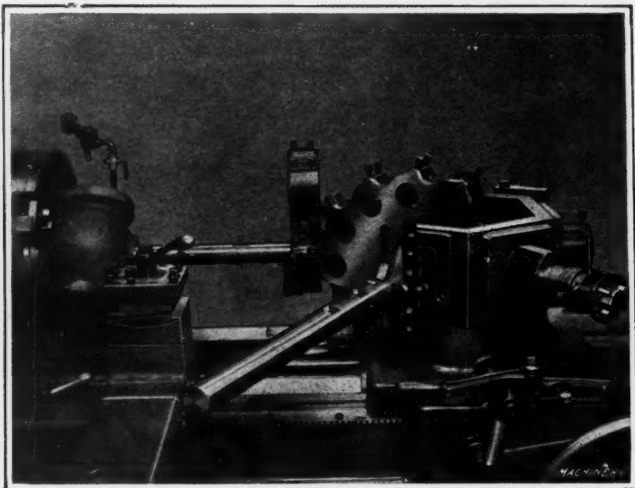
Set-up of Machine for performing the Second Operation on the Valve Body
